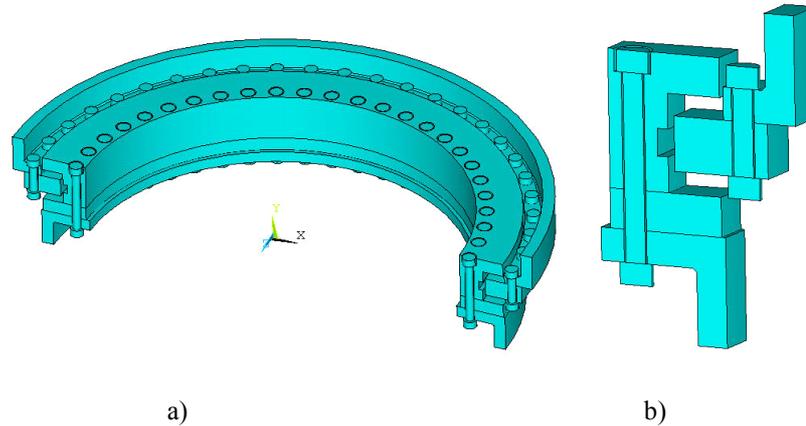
The assembly model of entire turntable bearing and flange(a) and the bolted connection of the same corresponding portions(b)
